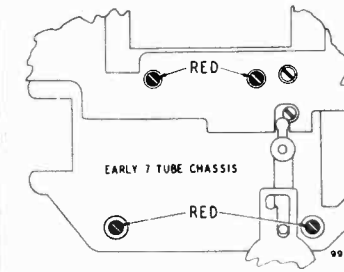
Location of 4 Red Mounting Screws in Early Models
